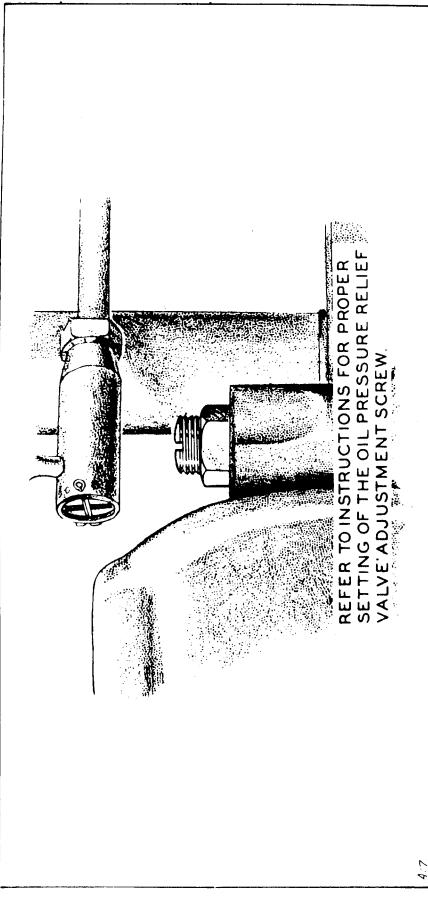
OIL PRESSURE RELIEF VALVE ADJUSTMENT
